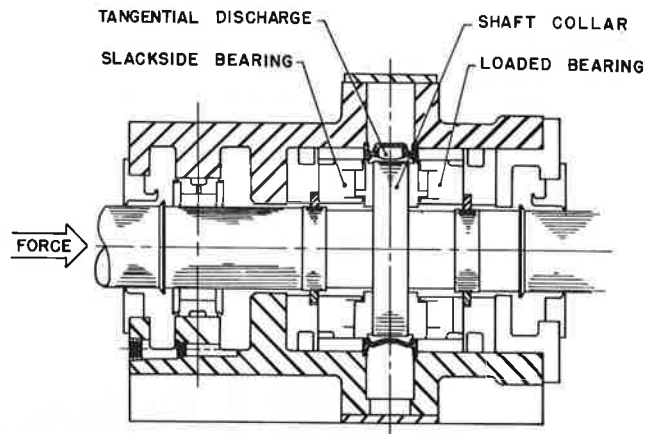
Cross-sectional view of housing interior showing location of loaded and slackside bearing elements on either side of shaft collar
